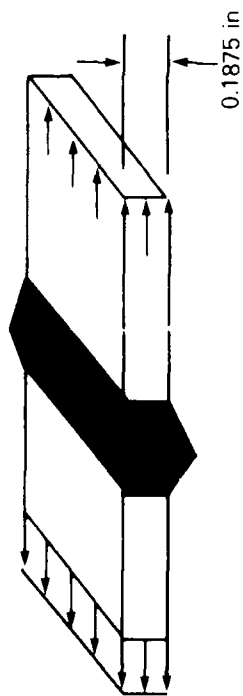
Plate containing a through thickness weld defect.
